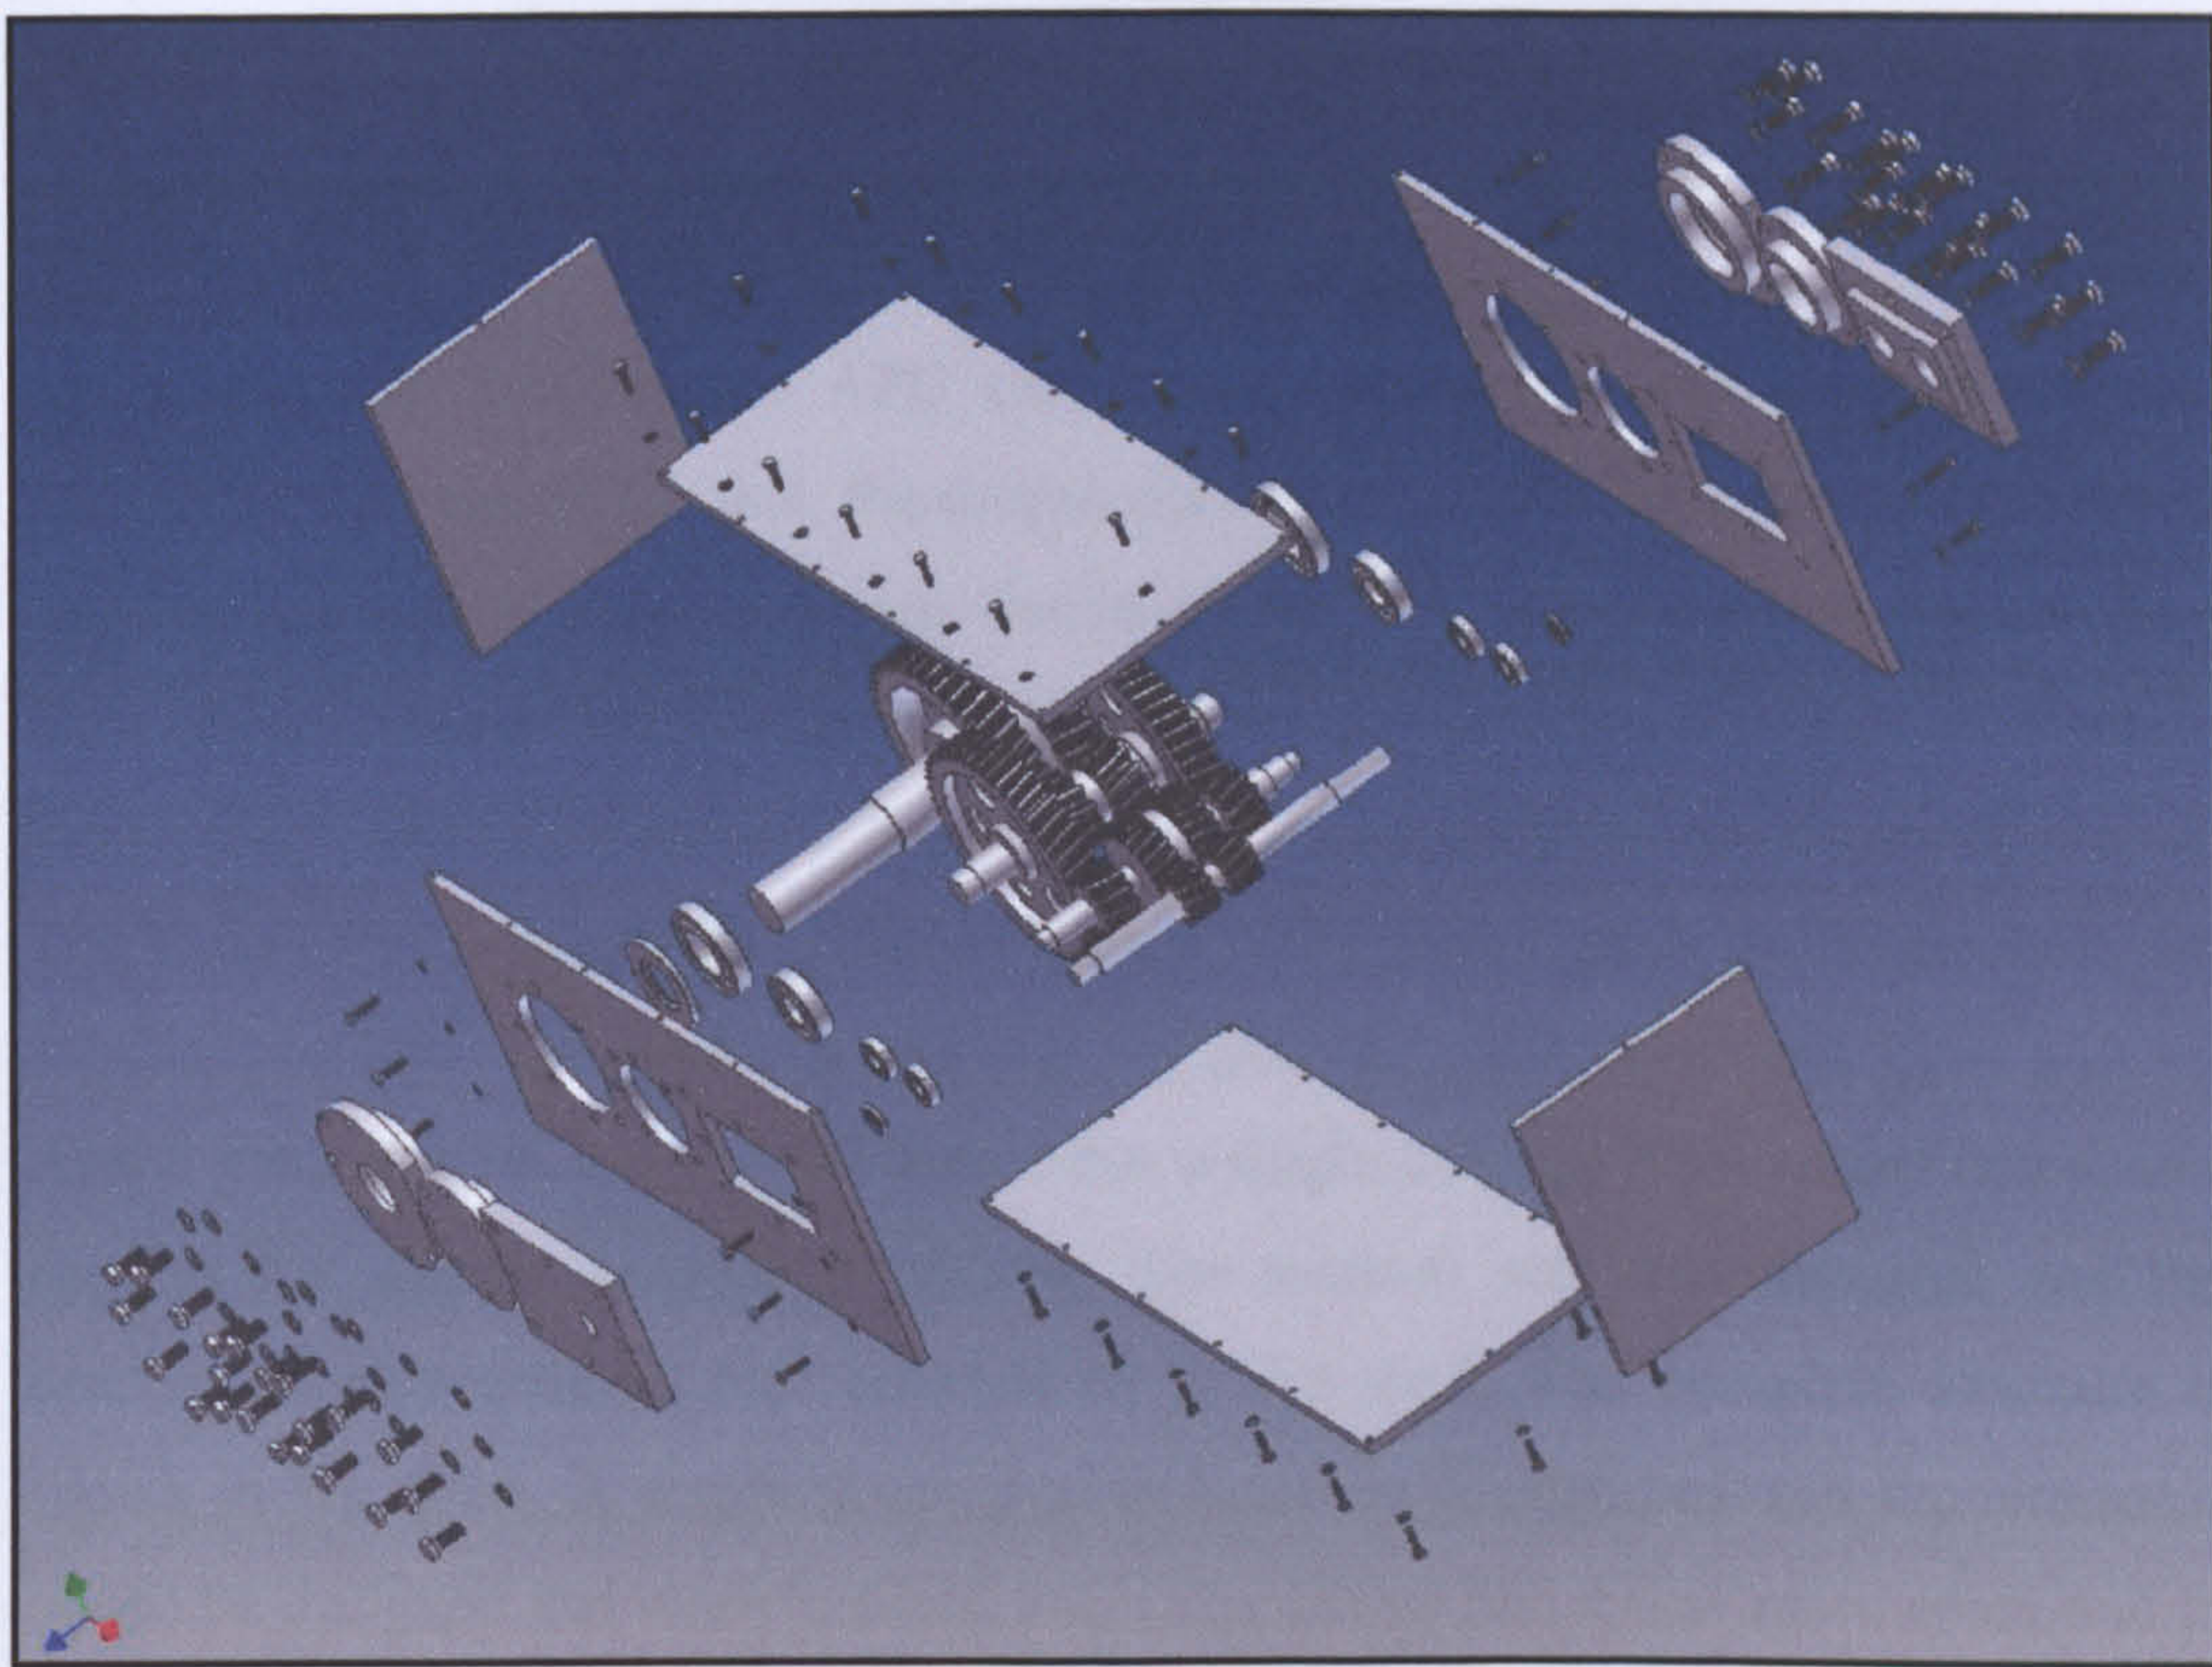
Assembly procedure for the various parts of the reduction gearbox
